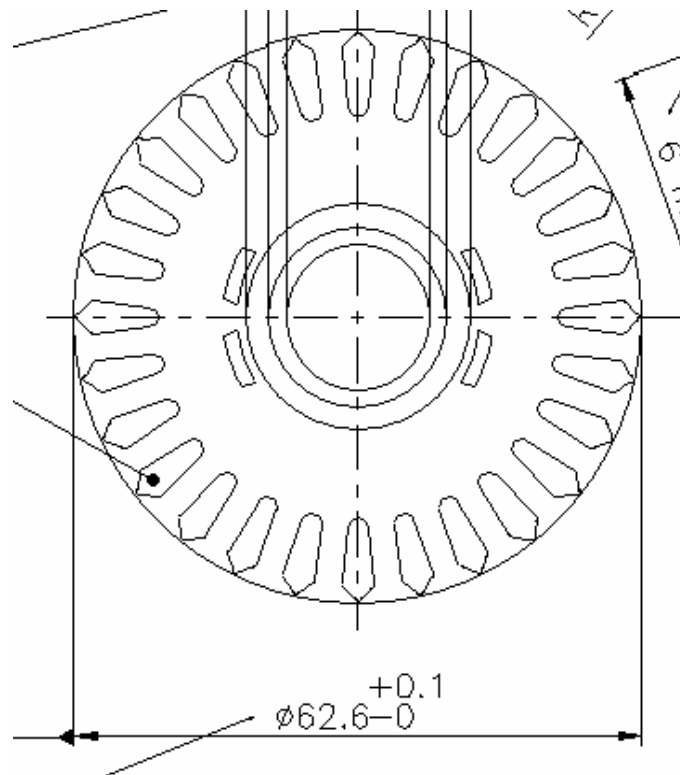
Cross-section of 28 bar rotor (skewed rotor)
